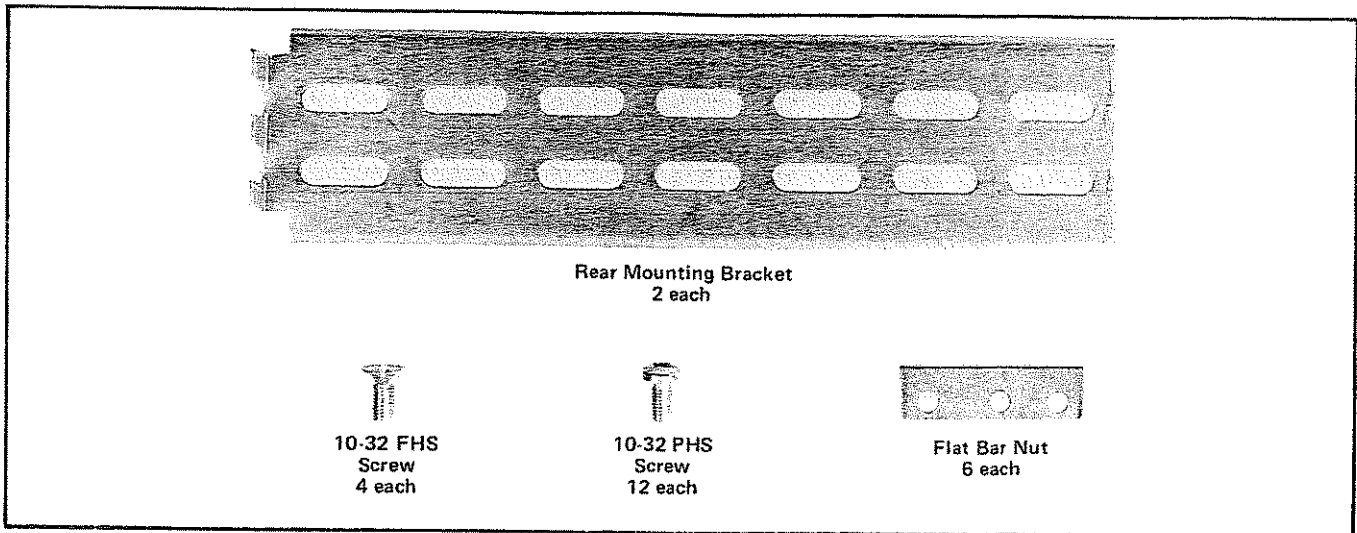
Small hardware components for mounting the stationary sections to the rack rails.
